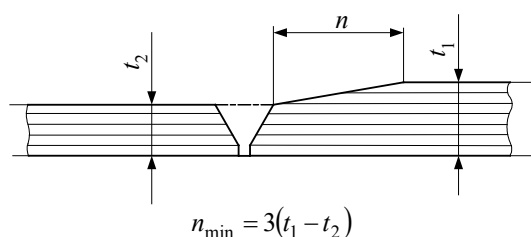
Edge preparation for welding plates of different thickness
